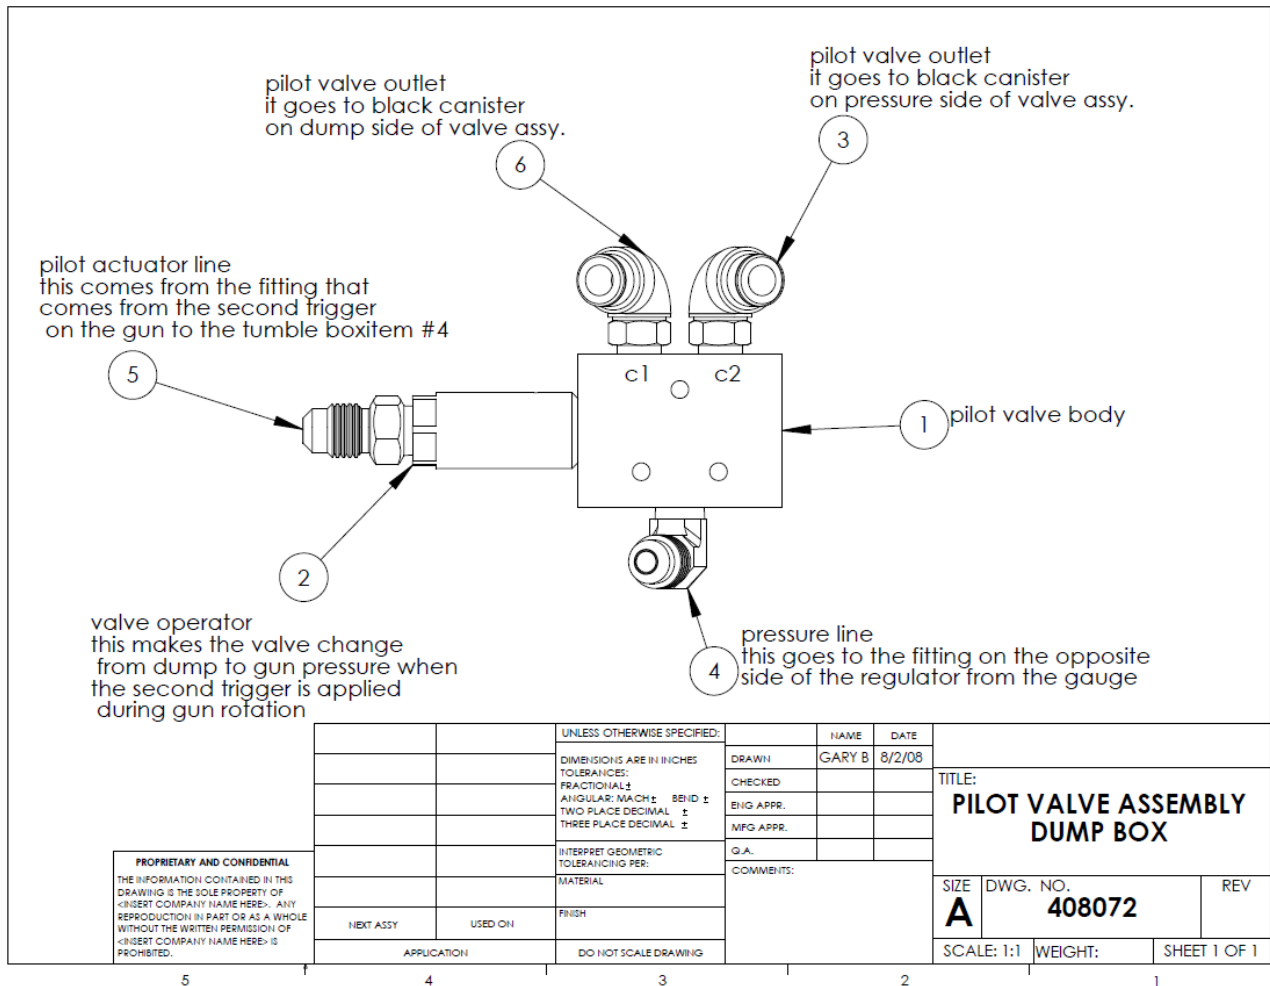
Drawing 408072 Pilot Valve Assembly Dump Box
